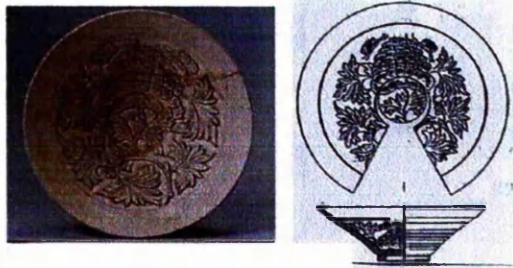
Matrix for hump moulds for impressing a complex design on the inner surface of a bowl
